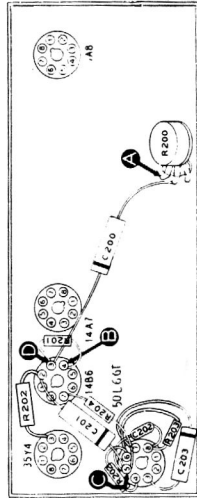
BOTTOM VIEW, SHOWING SECTION 2 TEST POINTS
